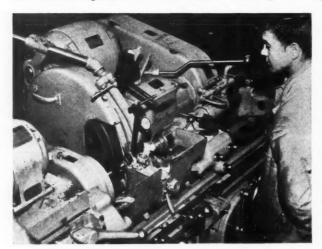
Grinding the needle-bearing end of an engine crankshaft, using a Norton Cylindrical Grinder. In the finishgrind operation the dimensions are held to a tolerance of 0.0003 inch.
